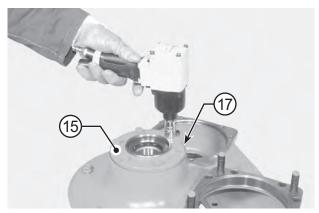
Assemble the cover (15) with screws (17) spreading Loctite 510 on surfaces.
